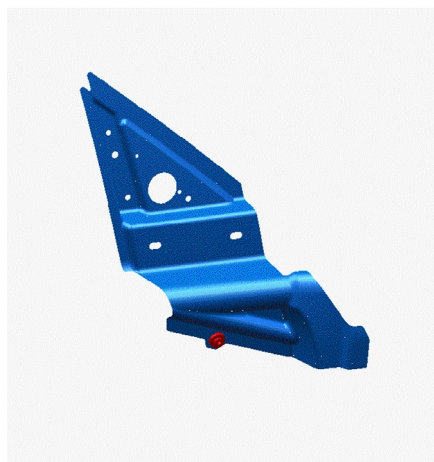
Assembly panel mirror flag outer
